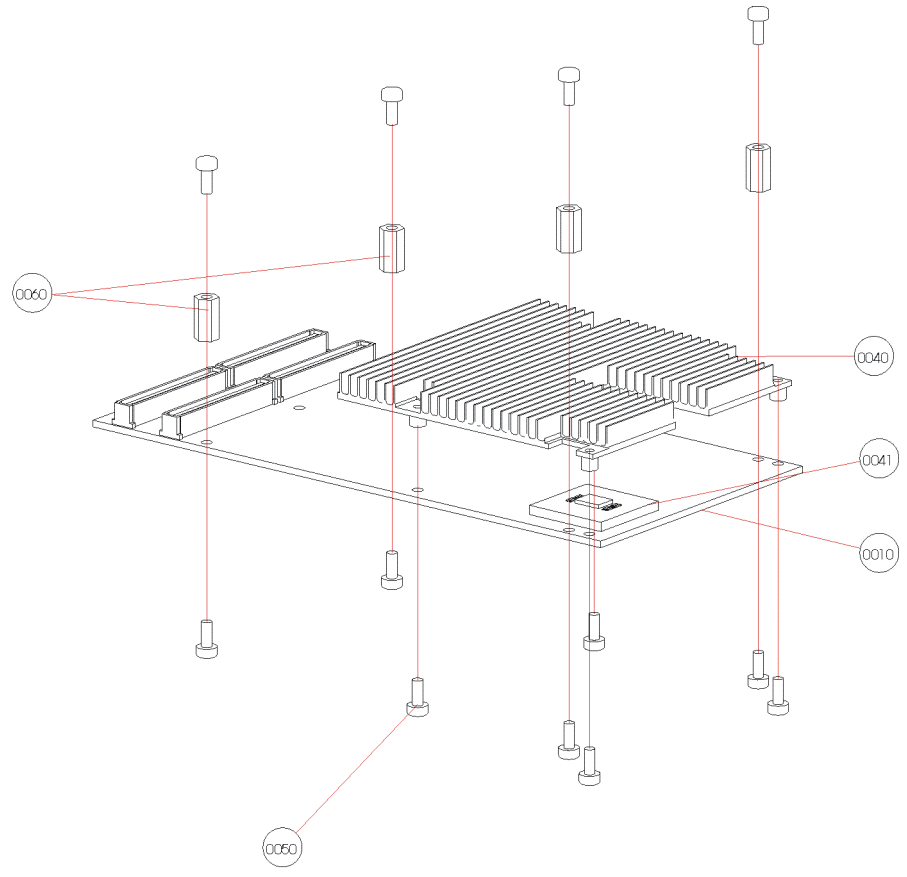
Top assembly exploded view for 120049 (variants 120047, 120048 and 120094 use the same heat sink)
